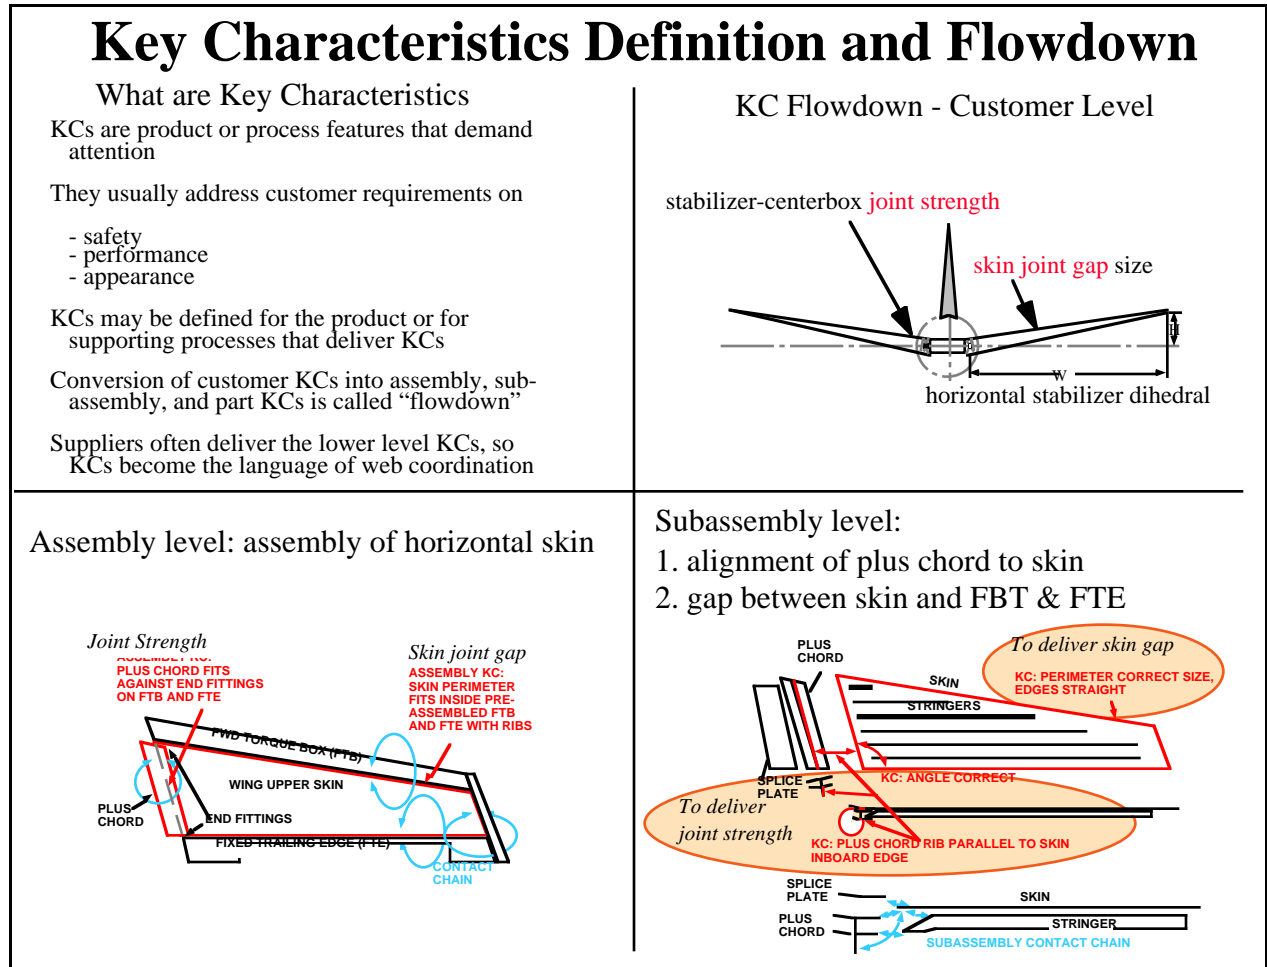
Outline of Key Characteristics Flowdown from Final Assembly at Customer to Parts Fabrication and Assembly at Supplier
